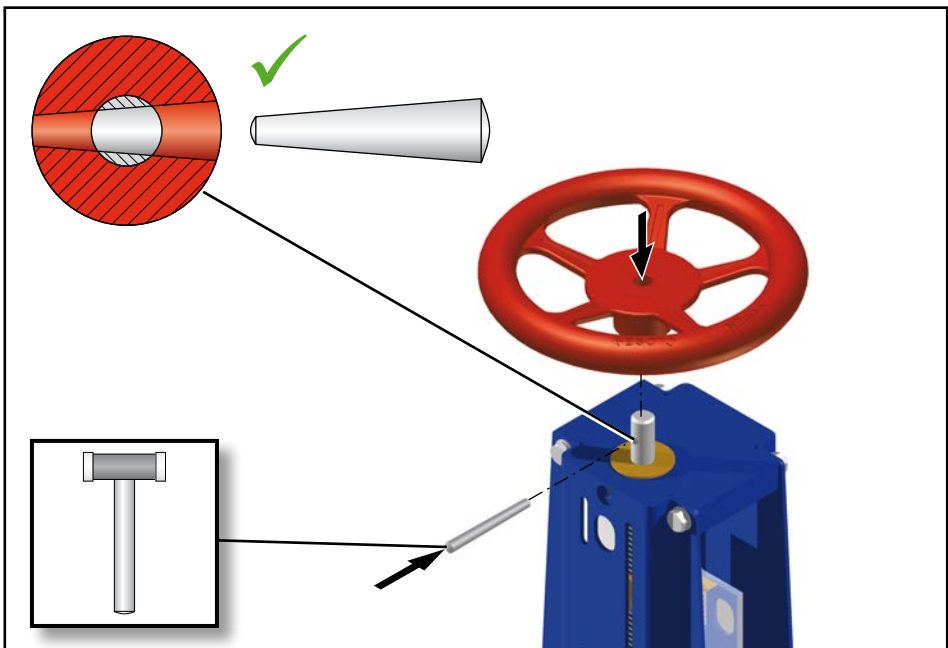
Mounting of the hand-wheel (picture shows Art. WGE-GG-xxx-100/MW)
